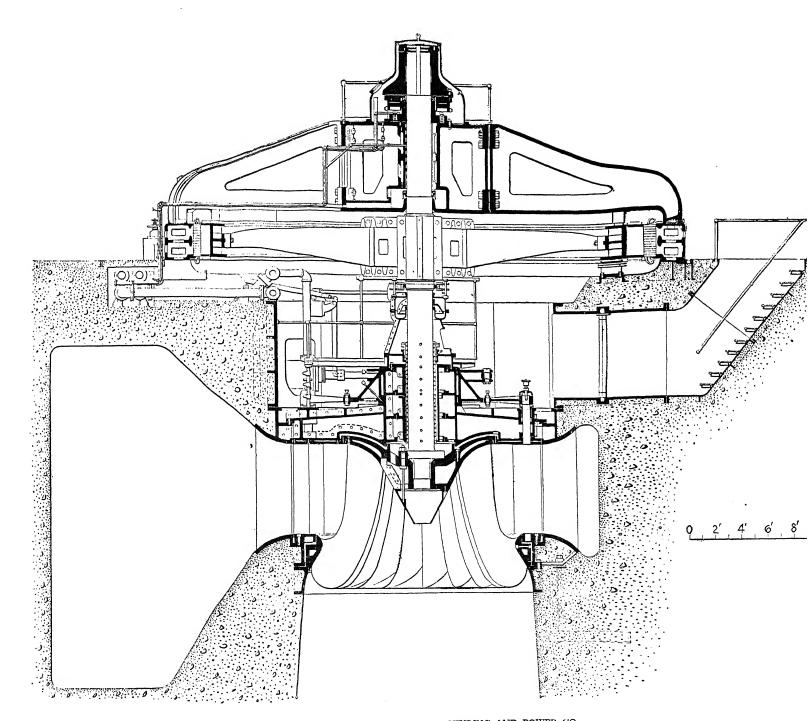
CEDARS RAPIDS MANUFACTURING AND POWER CO. 18,000 h.p.; 17 ft. 8 in. diam.; 30-ft. head; 55-6 r.p.m.
